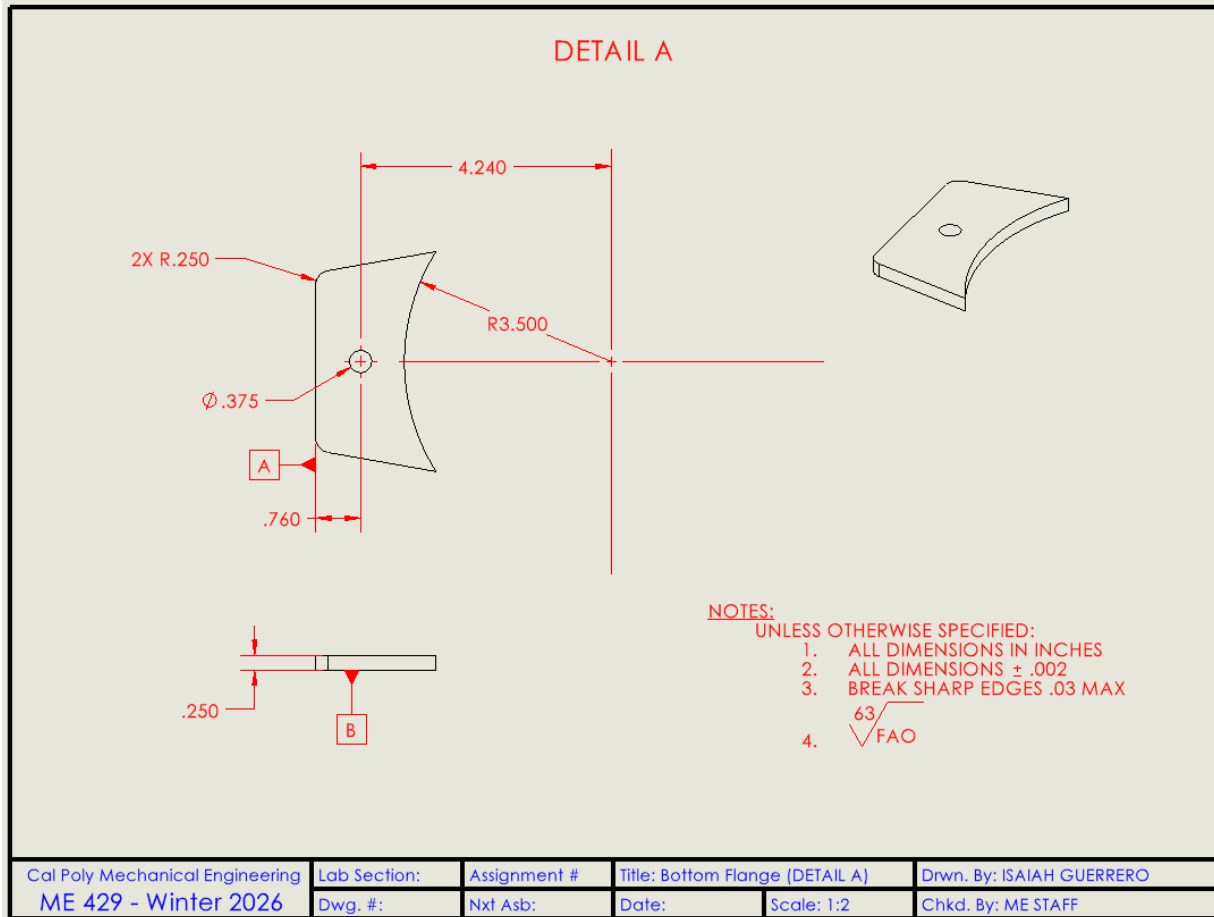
Detailed drawing of the Bottom Flange attached to the Female Plate for assemblies 1000 and 2000
